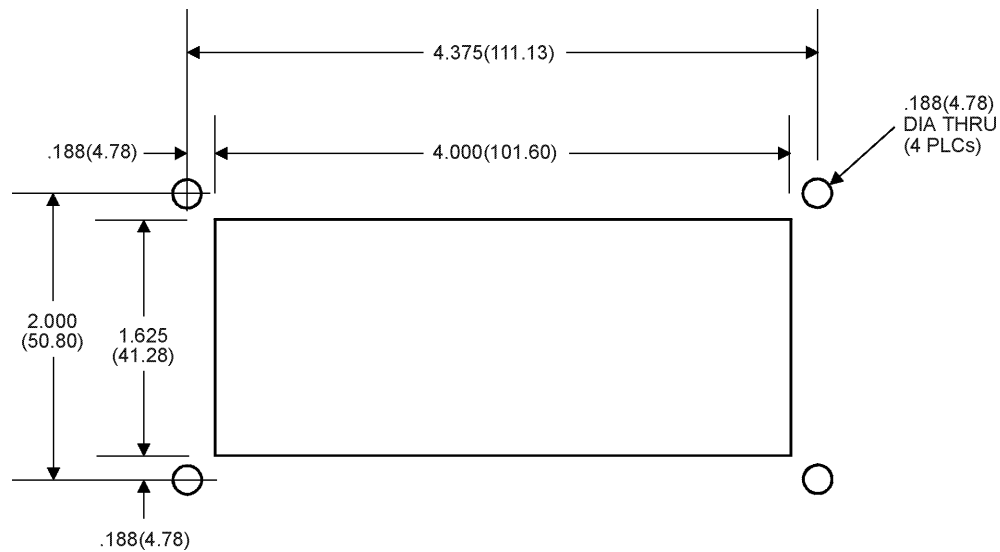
9. Front Mounted Connectors Cutout Dimensions
